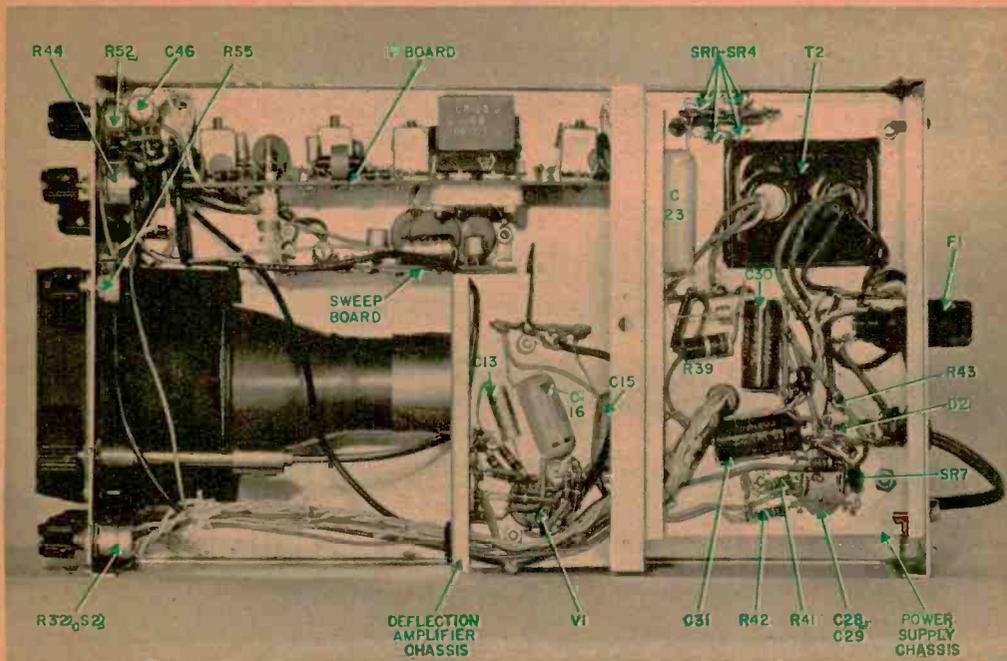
Head-on view of bottom of Monitor. Position parts in the power-supply and deflection-amplifier chassis exactly as shown. Cable below R39 in power-supply chassis comes from socket on rear of the CRT.
